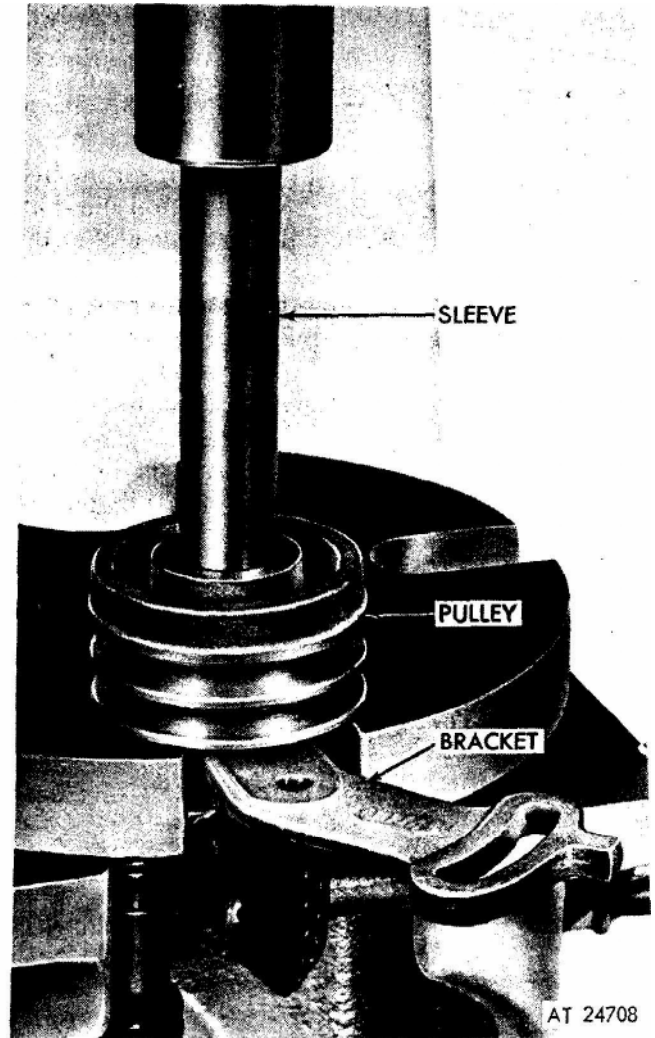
Removing shaft and bearing assembly and bracket from idler pulley.
